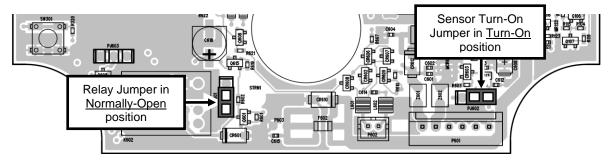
Sensor Turn-On Jumper Shown in Turn-On Position
